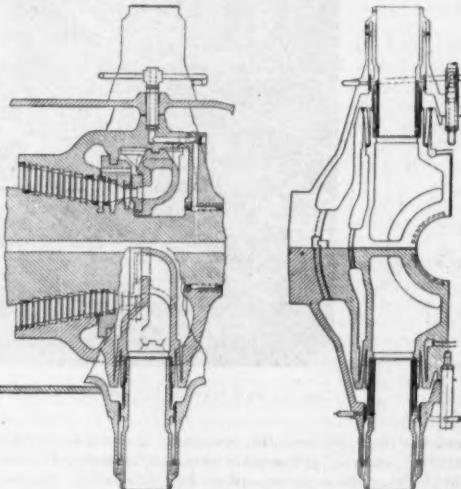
SECTION THROUGH HIGH-PRESSURE END OF INTERMEDIATE-PRESSURE ELEMENT
